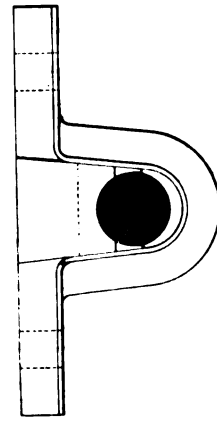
INSIDE SELF-LUBRICATING PEDESTAL.
